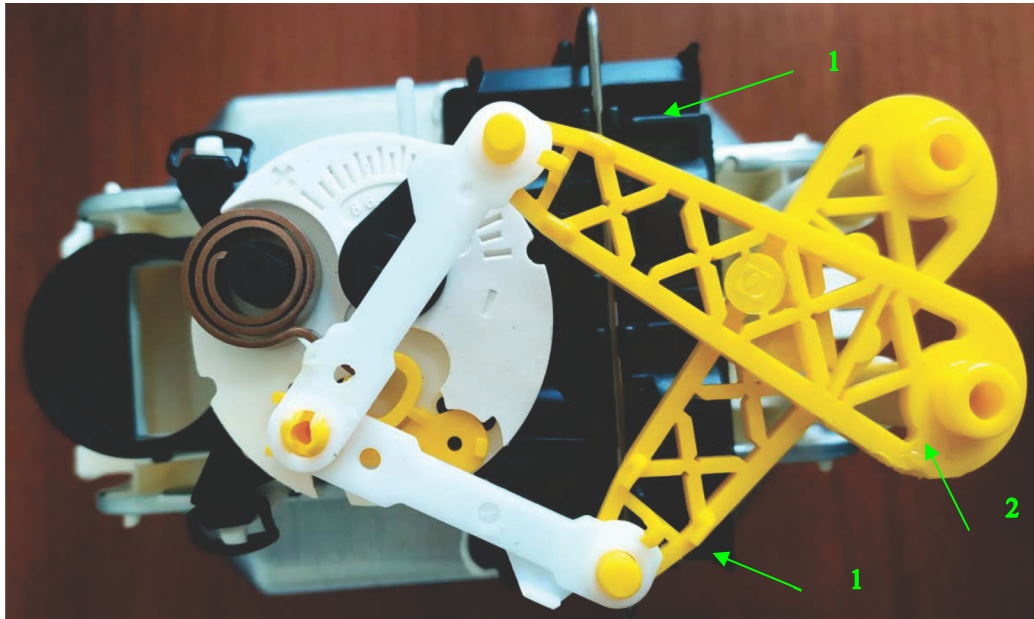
Image of the measuring mechanism of a membrane-type gas meter (top view), where: 1 - valves, 2 - crank-lever mechanism
